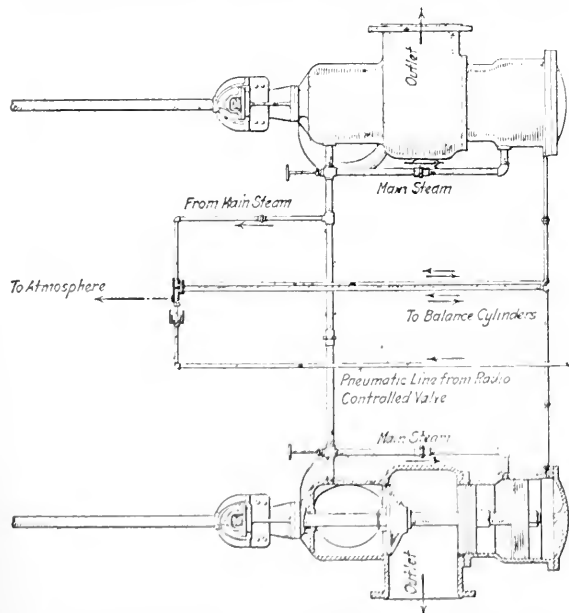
DIAGRAMMATIC ARRANGEMENT OF QUICK-CLOSING MAIN ENGINE THROTTLE VALVES AND CONTROL VALVE
